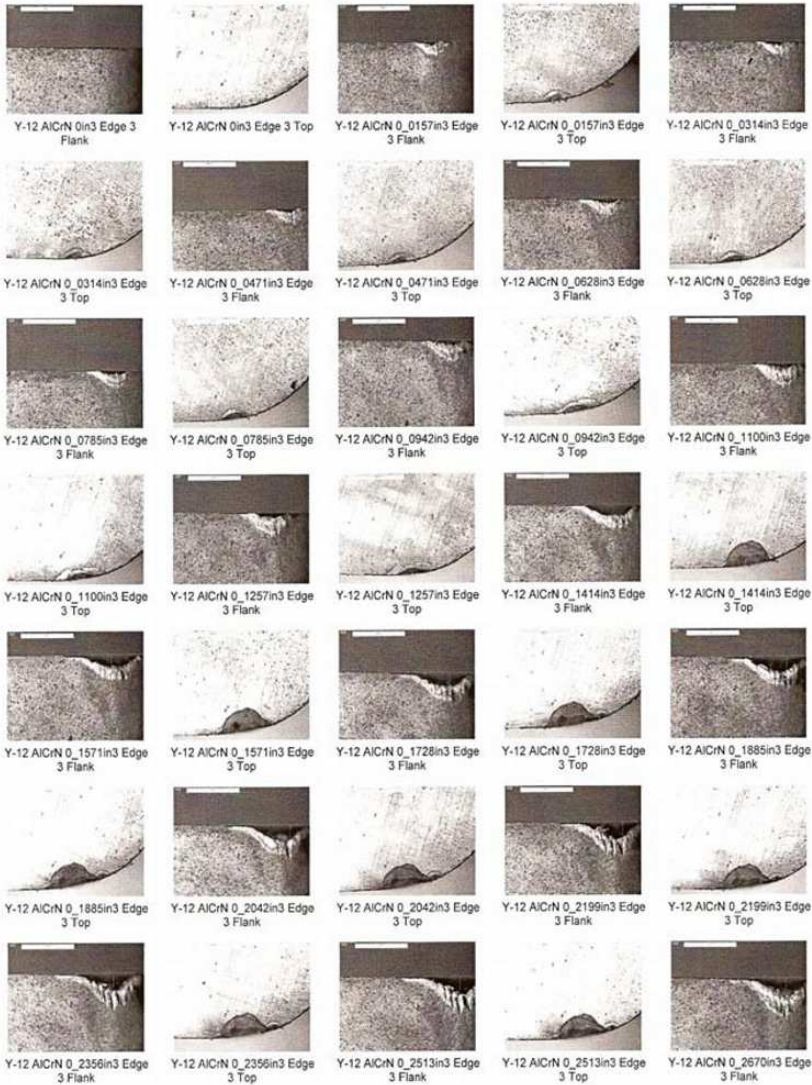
AlCrN Tool Cutting Edge 3 machined at 200 RPM. 0 - 0.2513 in³ workpiece removed
